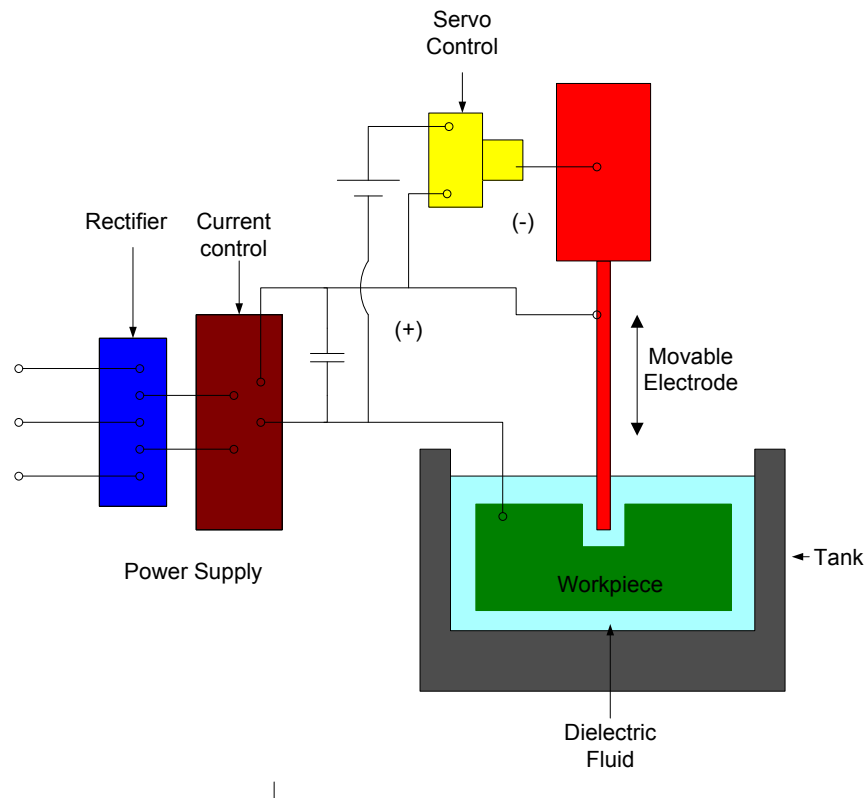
Electrical Discharge Machining (EDM)[59]
